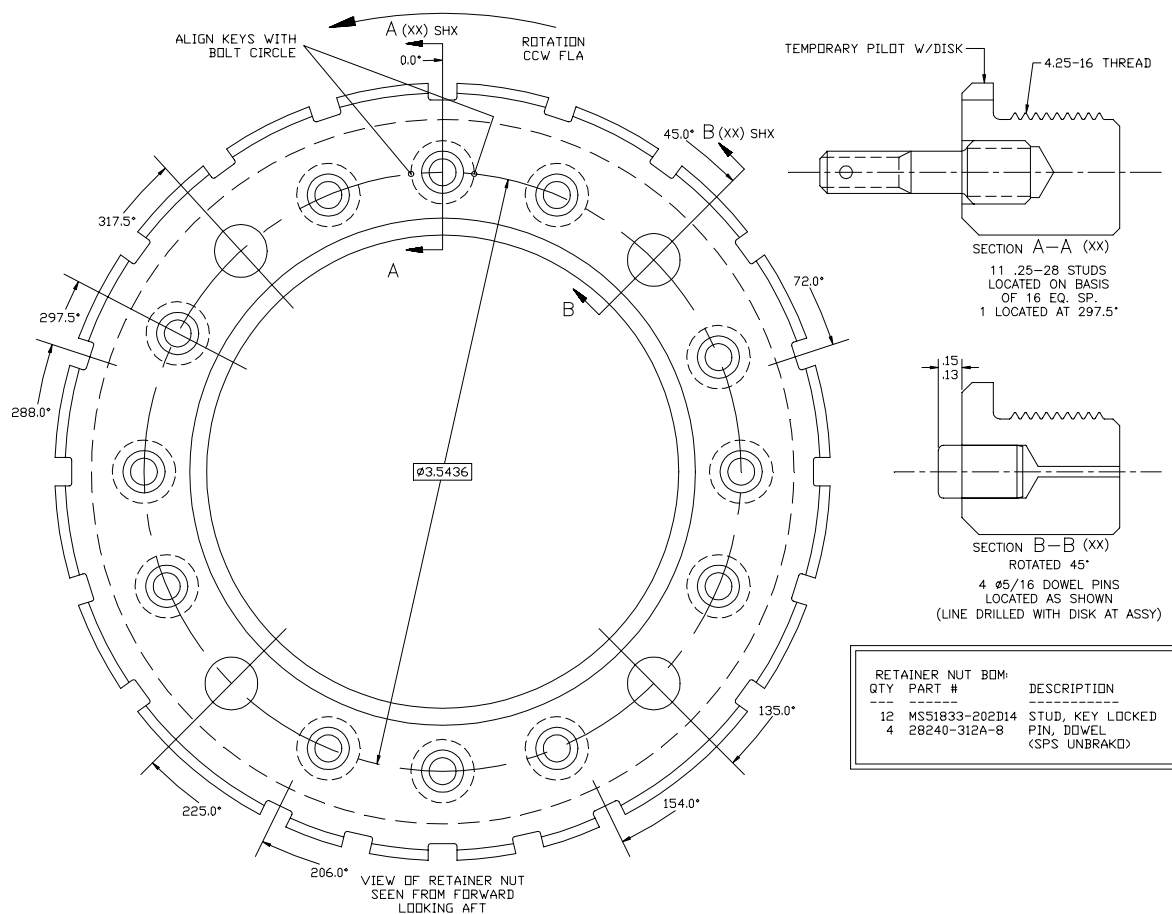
Rotor Bolt Circle in Retaining Nut Showing Bolt and Key Locations.
